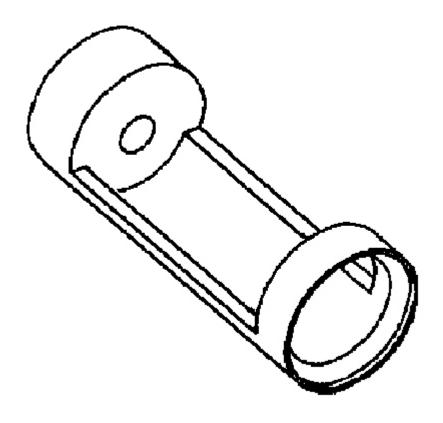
Valve Spring Adapter 6527 Courtesy of CHRYSLER LLC
